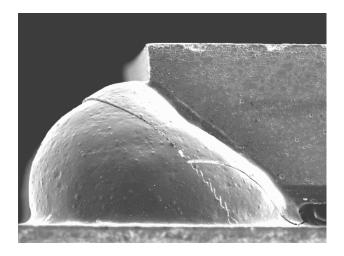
Photograph of Cracked Corner Bond Underfill after Drop Testing.
